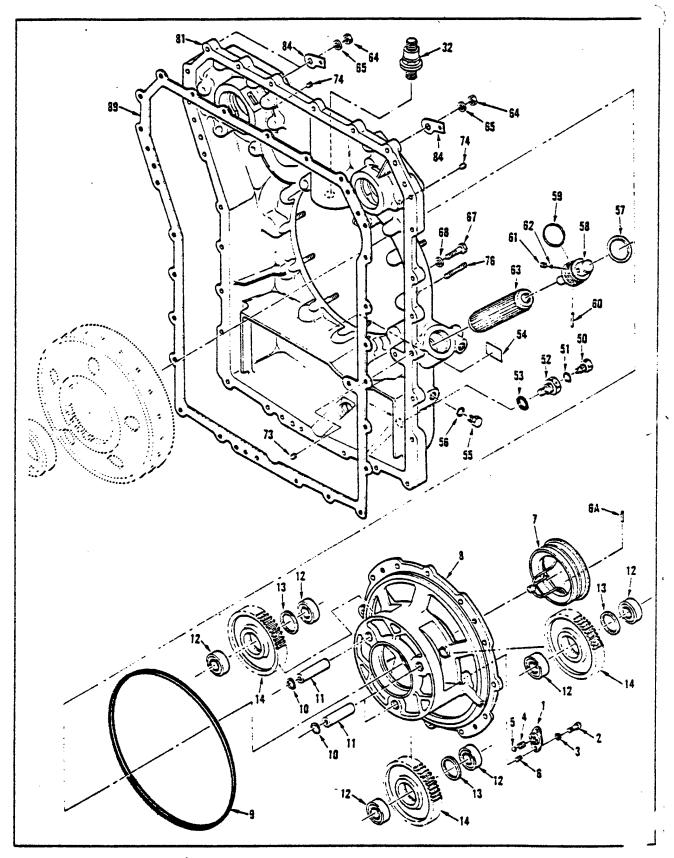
Gear Reduction and Accessory Drive Assembly (Sheet 2 of 2)
